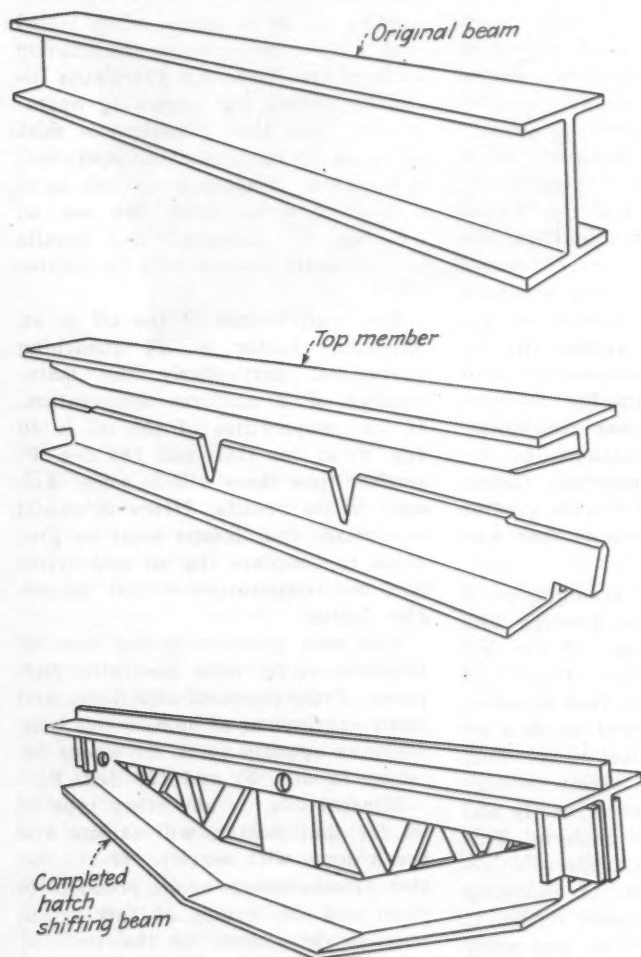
Transformation of standard I-beam to patented Globe hatch shifting beams. Beam is oxyacetylene flame split longitudinally along the web; ends are flame cut by hand, employing templates; V-notches are flame cut and beveled on welding edges. Parts are then jugged after forming bottom member; struts, plates, angles, etc., welded in, and hatch shifting beam is complete.
